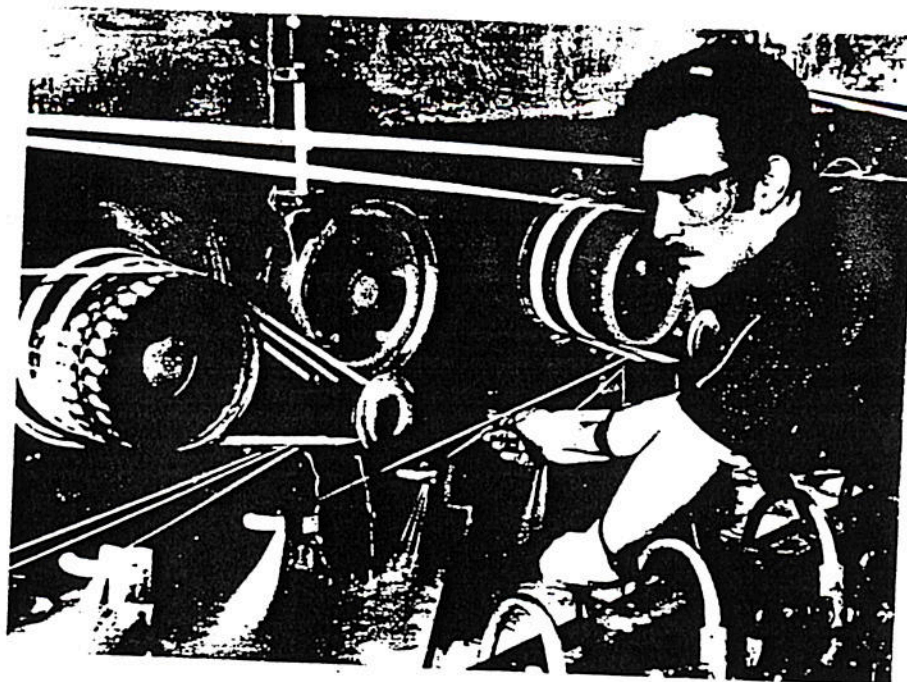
Spinning machine. (Courtesy of Courtaulds Ltd.)
